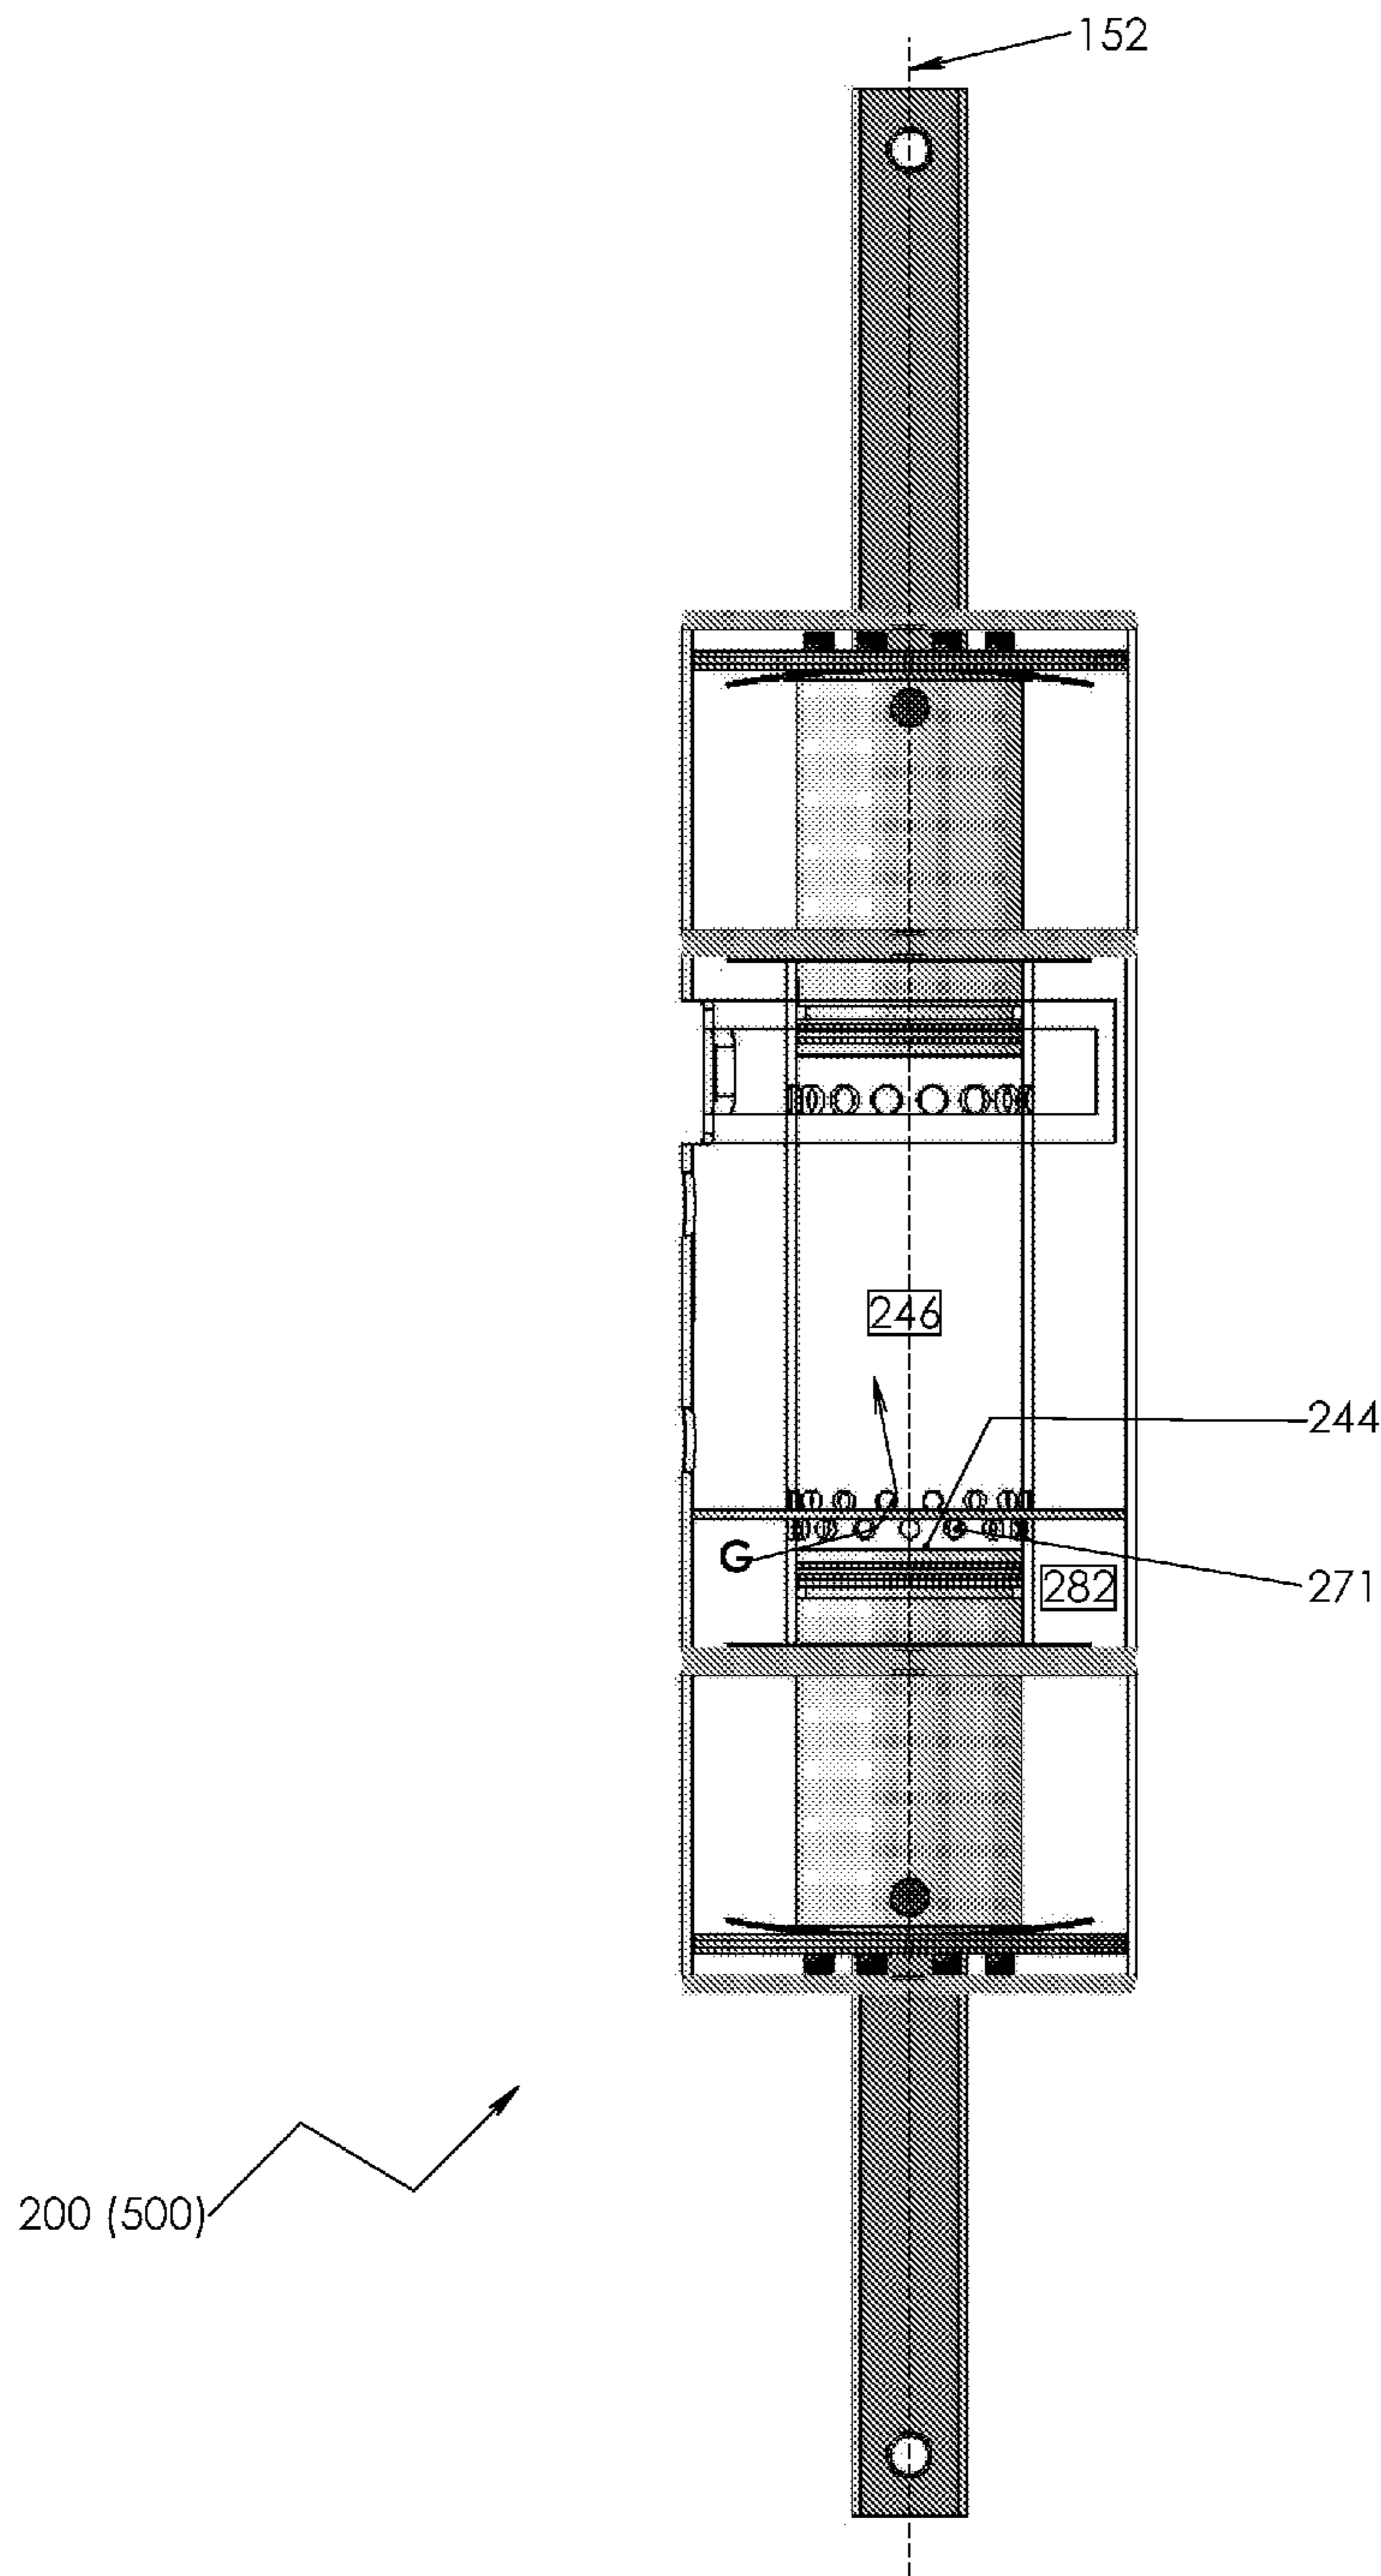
E. SIDE, CROSS-SECTIONAL VIEW OF COMBUSTION ASSEMBLY DURING ENGINE CYCLE
